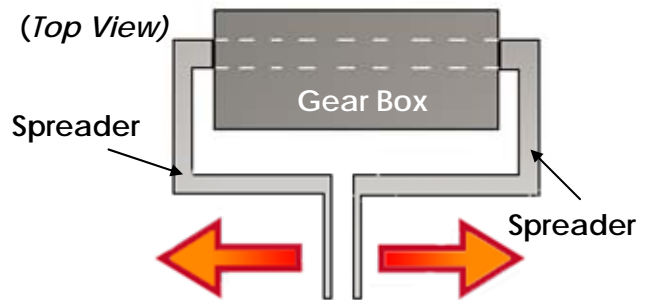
Frontal view of ring spreader showing the motion of the spreaders when cranked relative to the gear box spreading them.
